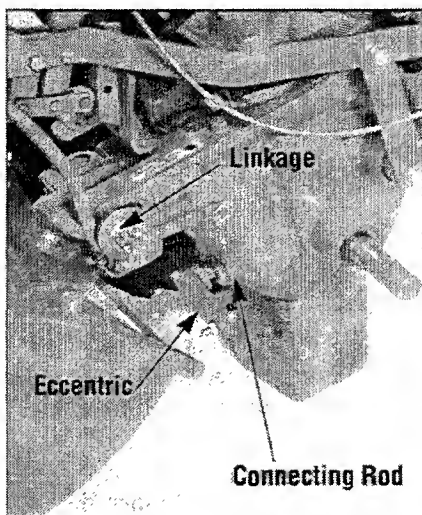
Check connecting rod, shifting linkage and eccentric lever.
